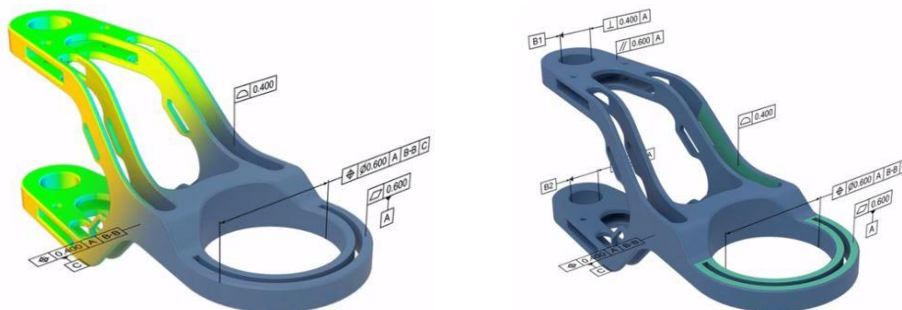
Inspected part for geometrical tolerances check [19].
